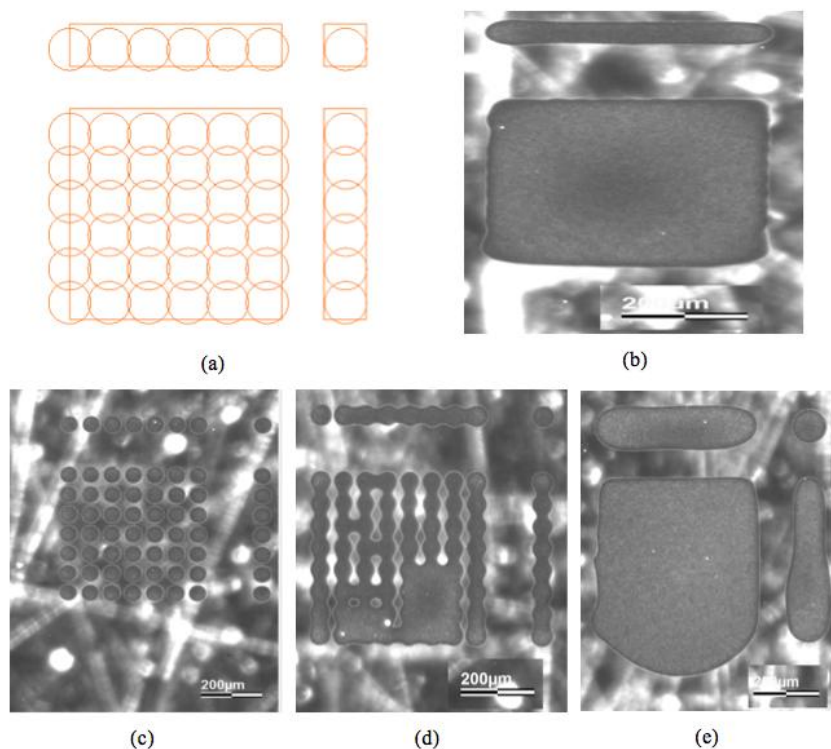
(a) “Vector test” design pattern; four basic morphology of printed line based on printing parameters: (b) Well printed pattern; (c) Isolated pattern; (d) Scalloped pattern; and (e) Bulging pattern. Silver ink was used for these experiments.
